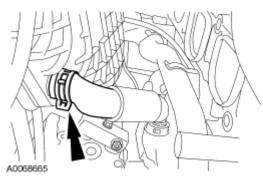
Locating Positive Crankcase Ventilation (PCV) Hose Courtesy of FORD MOTOR CO.
